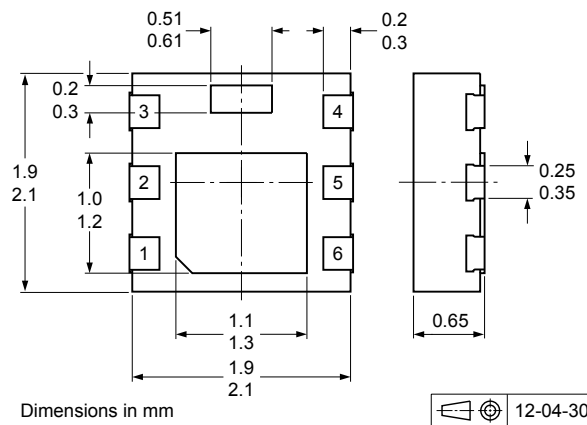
Package outline DFN2020MD-6 (SOT1220)
